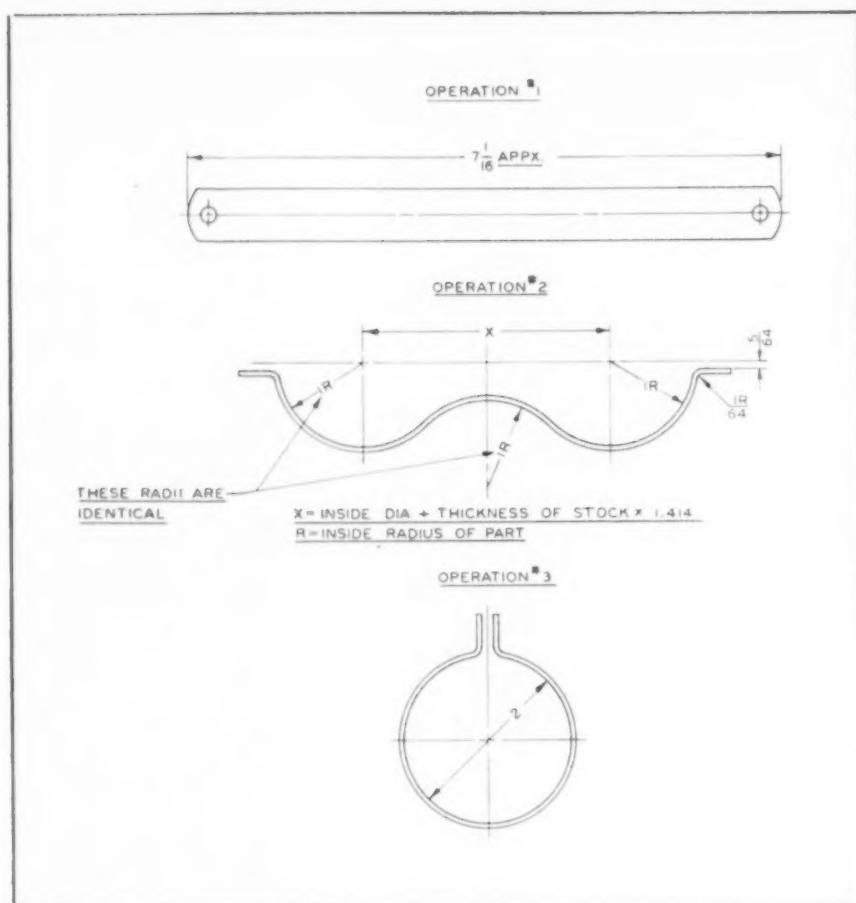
, above, shows three operations, blanking, and first and final forming, required to produce part.
